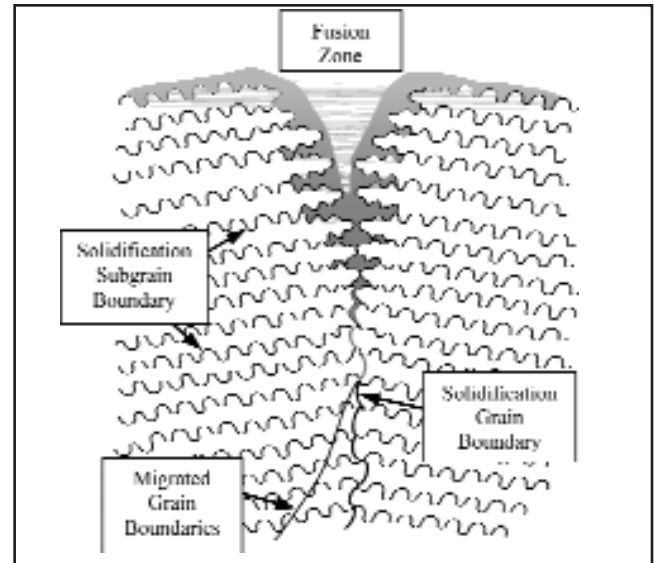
Schematic of types of weld metal boundaries observed metallographically in single-phase austenitic weld metals (Ref. 9).
